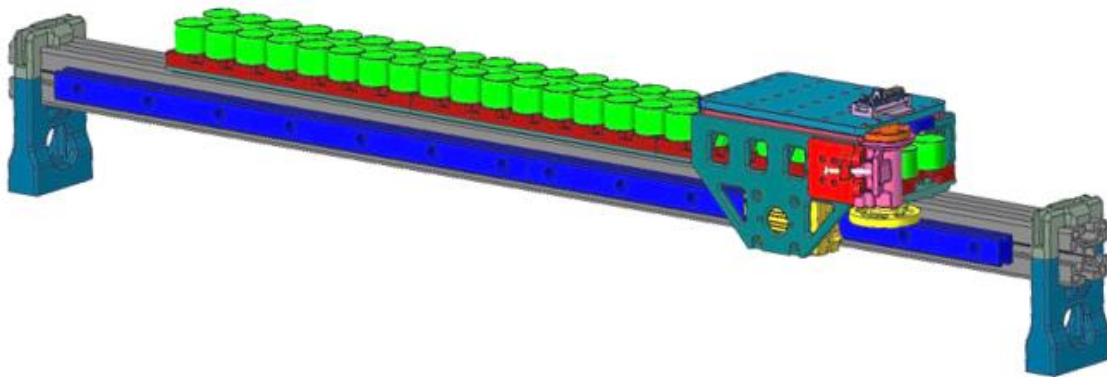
Assembled Machine Unit. System integrating the linear magnetic actuated conveyor (Fig. 4.4)
